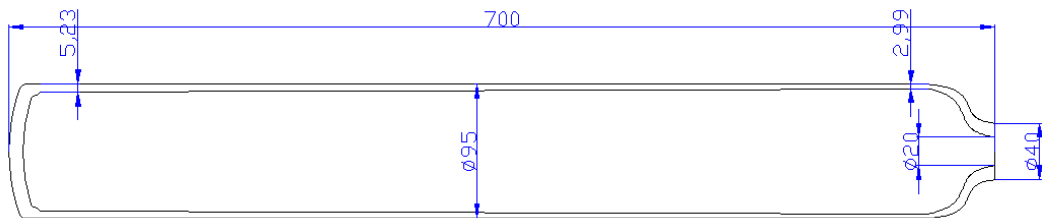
Linear dimensions of the hydrogen storage tank prototype.
